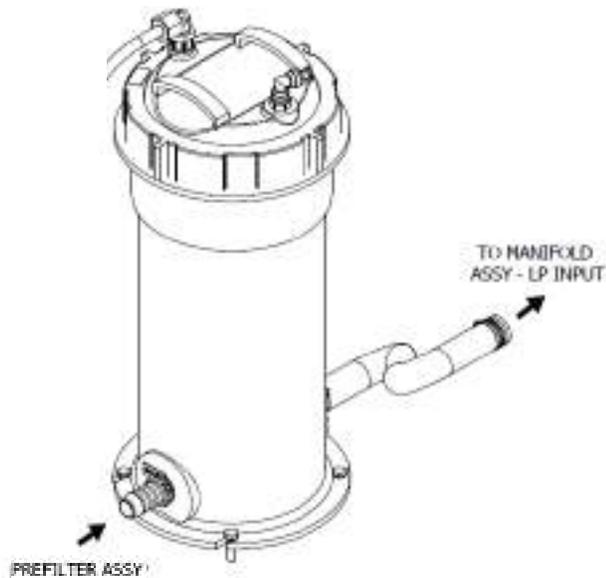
Boost Pump Assembly (BP-1 & BP-2)
